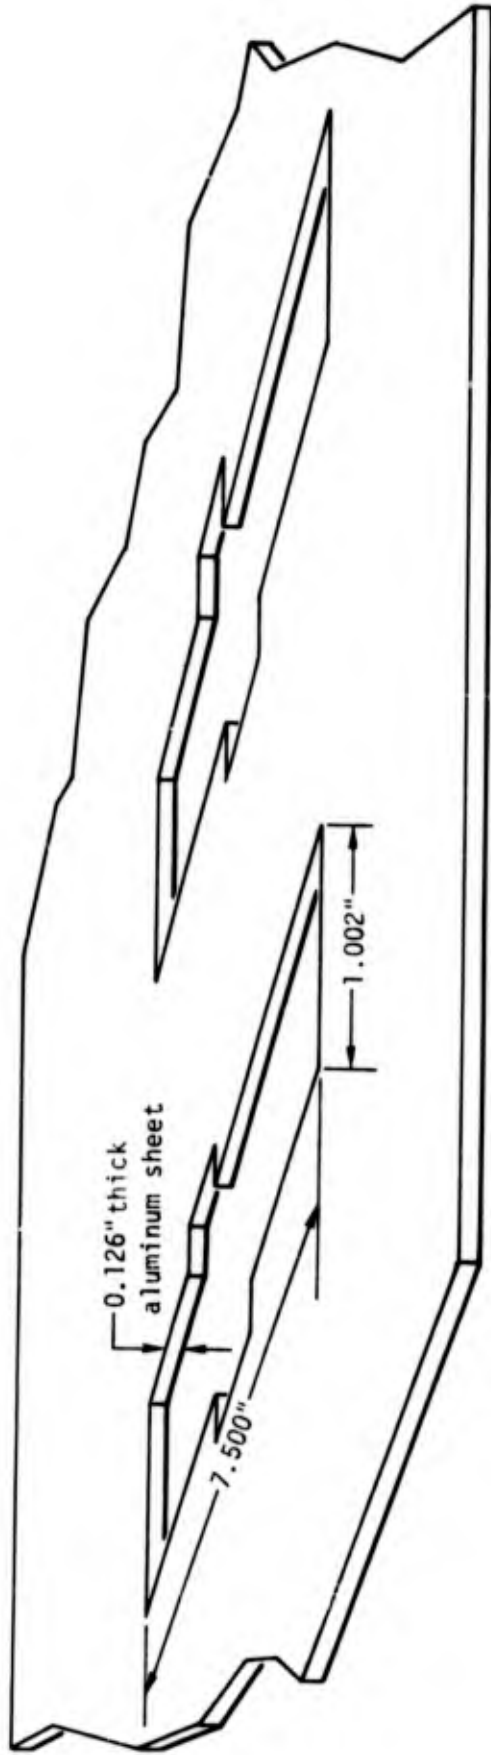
Schematic drawing of cut out sections for the bonding jig.
